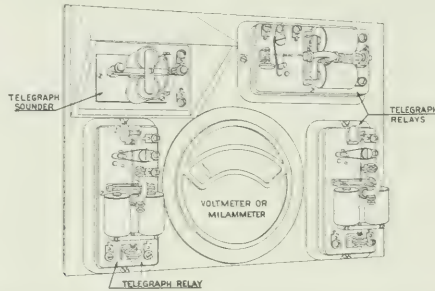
Typical Assembly of Apparatus Panel for Panel Mounted Test Board
